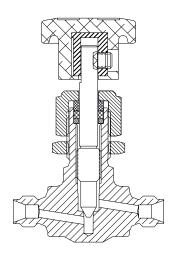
Cross Sectional View of Needle Valve with Parallel PTFE Packing
